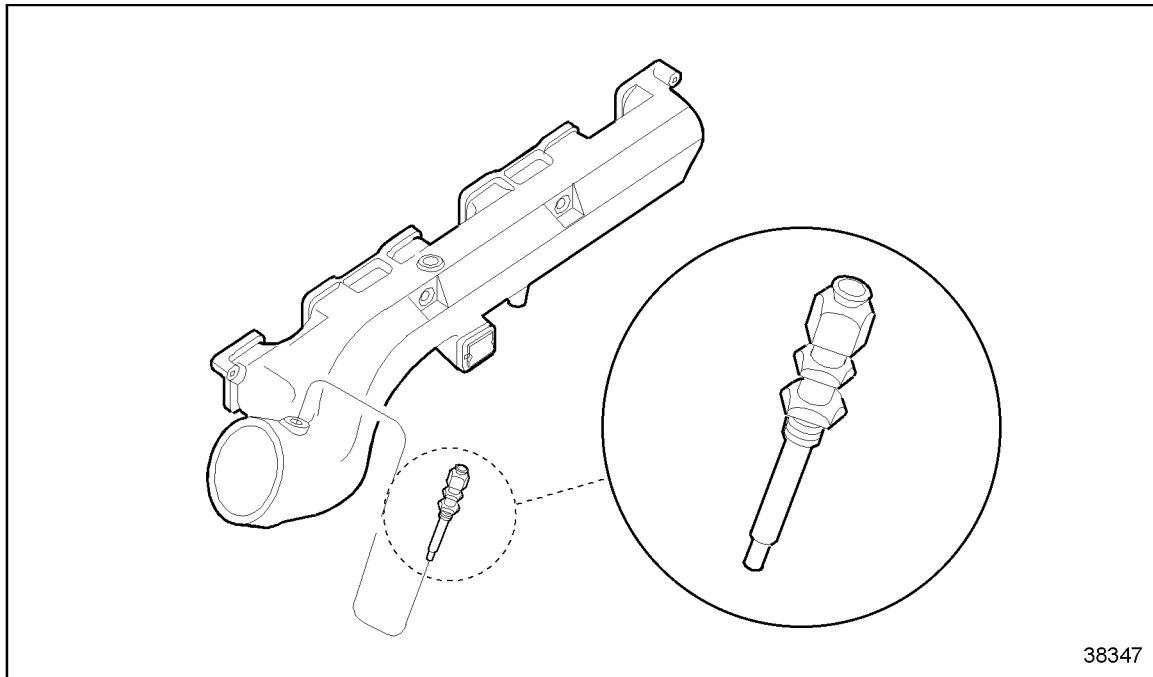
Series 60 Intake Manifold - Injector Nozzle Location
